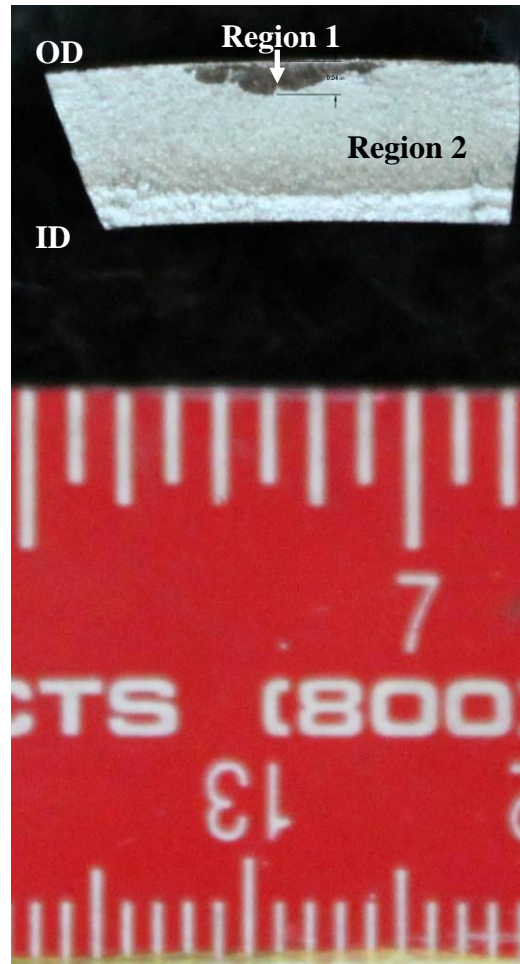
Photograph of the fracture surface from Crack Colony 12.
